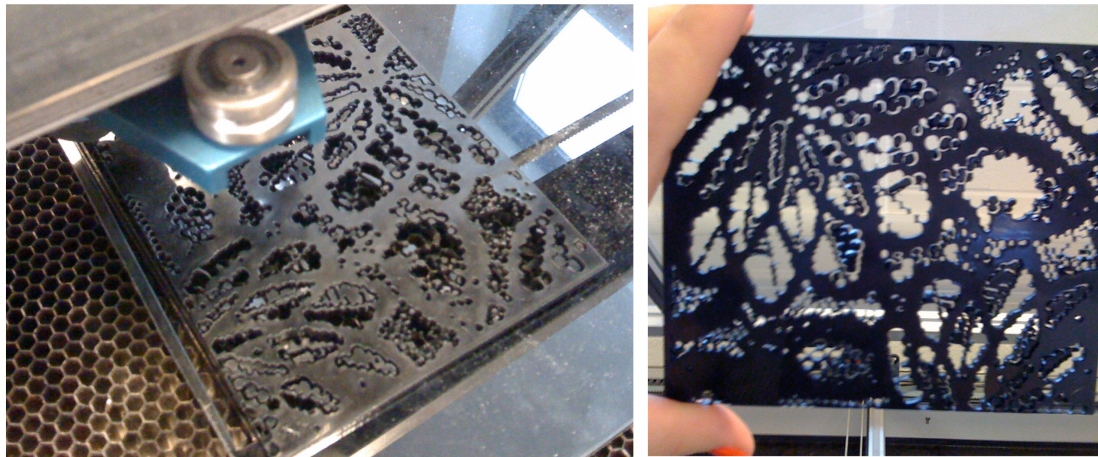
Laser cut Perspex sheet -10cm x 10cm
